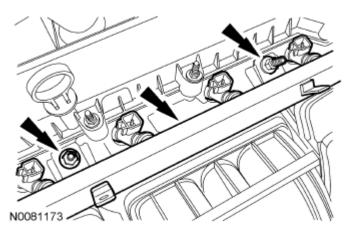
Locating Stud Bolts, Fuel Rail And Fuel Injectors Courtesy of FORD MOTOR CO.
